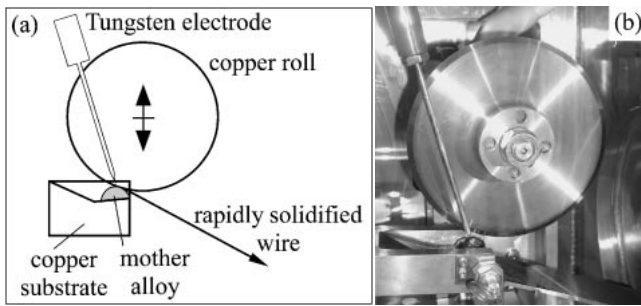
Schematic Illustration of Arc-melt type melt-extraction machine used in the present study. (a) schematic illustration of the method, (b) photograph of machine.
